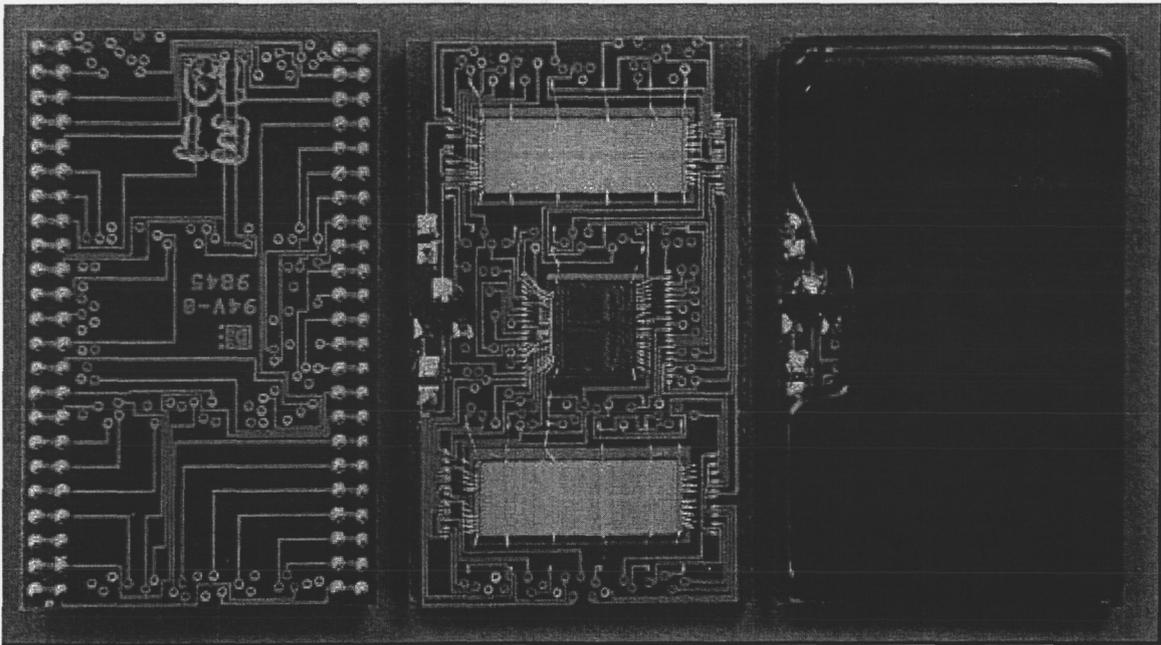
Example of MCM-L Fabricated at Auburn University. Left: Bottom side of MCM-L, Center: Top side before encapsulation, Right: Top side after Encapsulation.
